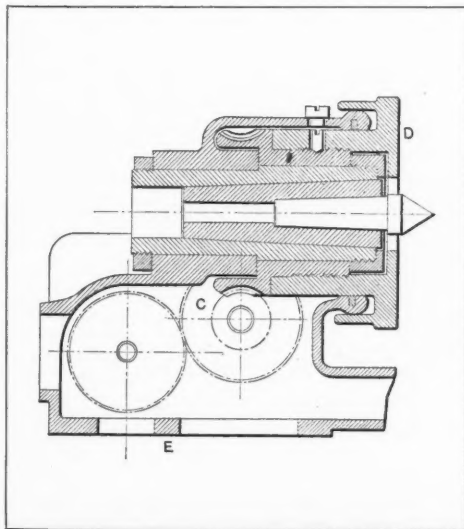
Cross-section through Driving Center showing Drive through Worm and Wheel C
